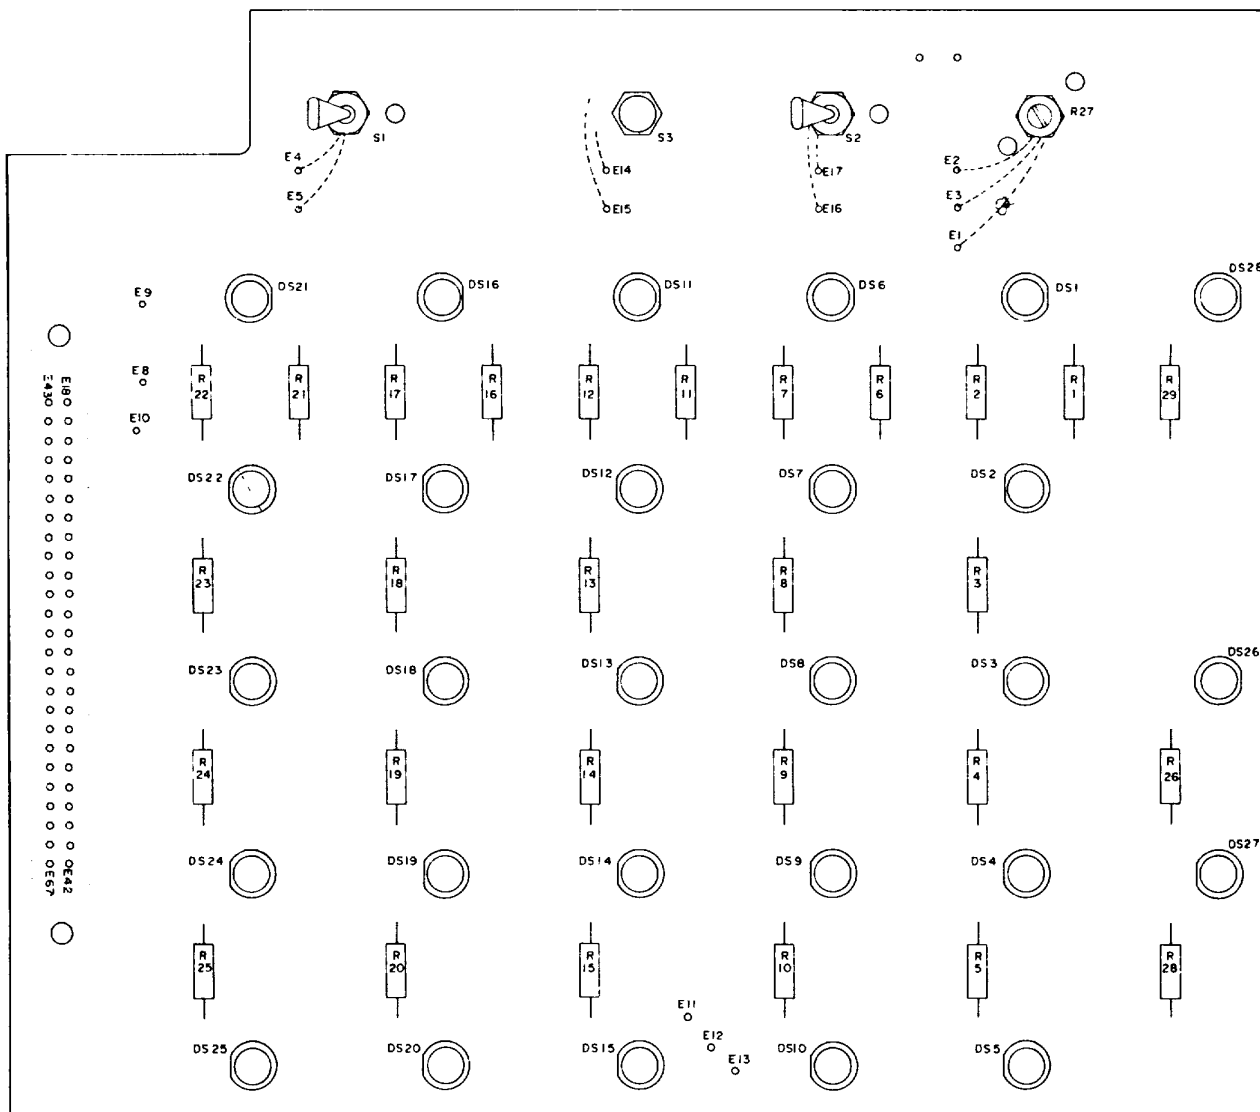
LED Display Circuit Card Assembly, 4A1 Parts Location Diagram
